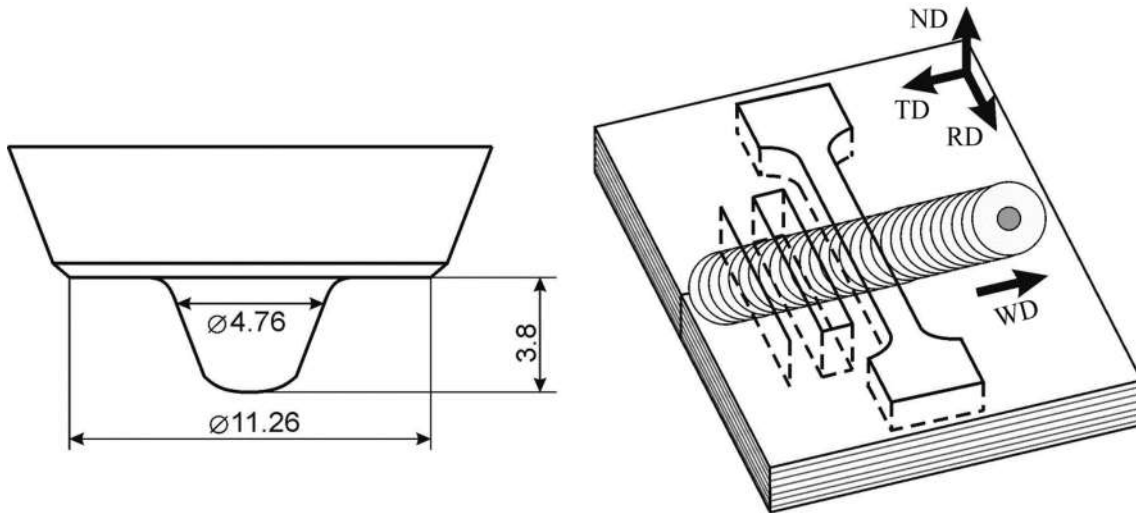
Schematic drawing of the FSW tool and FSW joint.
